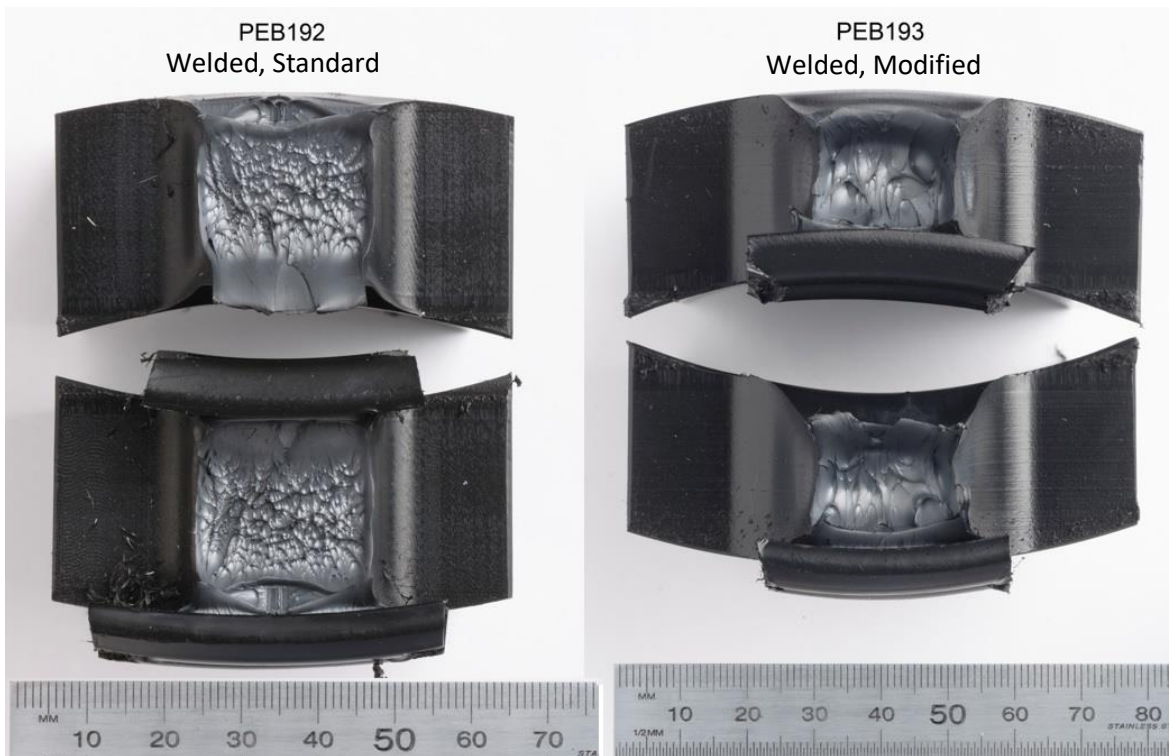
, Fracture surface of the welded standard specimen on the left and modified welded geometry on the right from welded 280mm OD pipe
